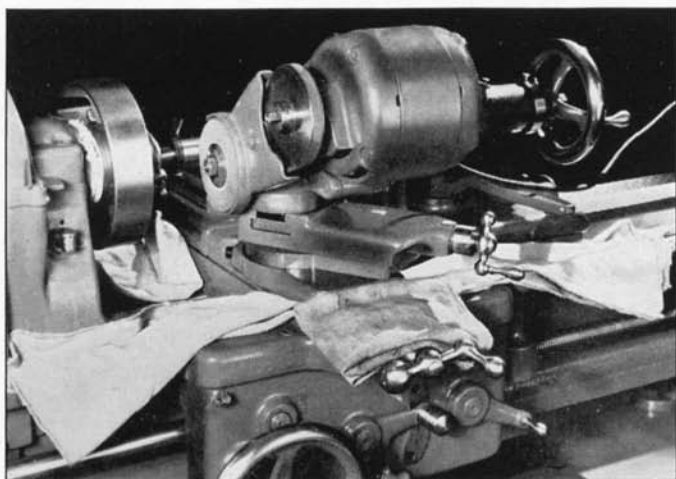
The bed and other bearing surfaces should be well protected from emery dust when a tool post grinder is used on the lathe.
